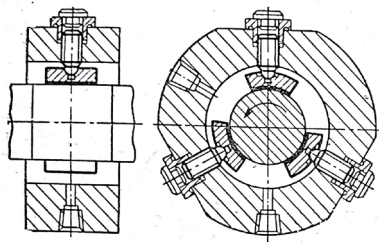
Cross section of a self-aligning hydrodynamic bearing on an external cylindrical grinding machine [1].
